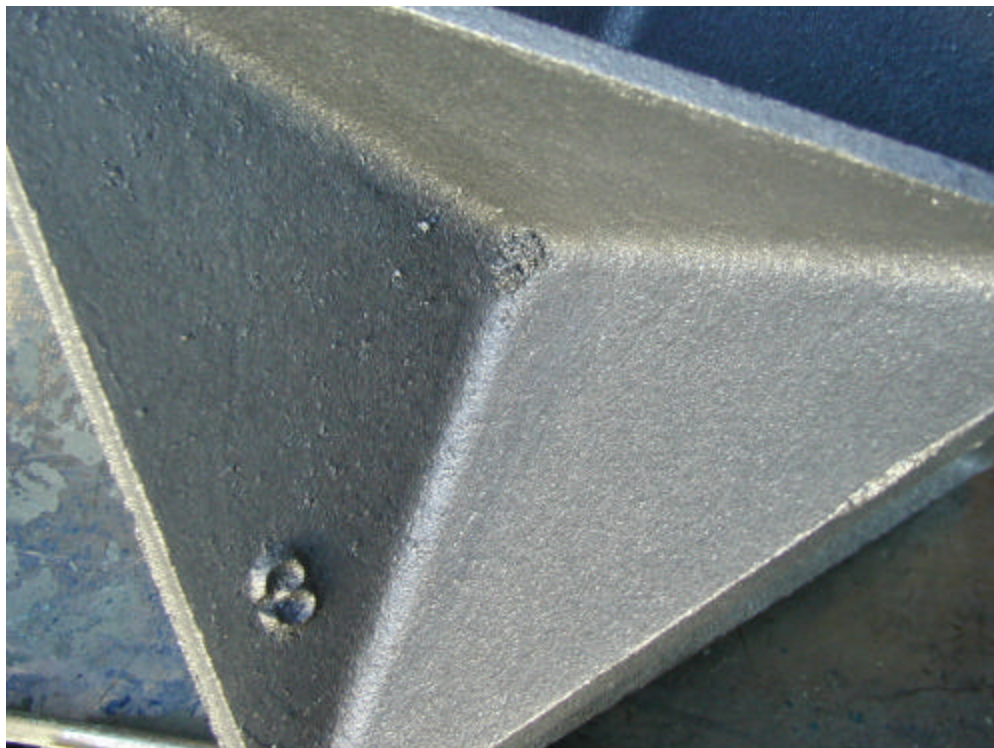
Mold FN001 cavity 3 casting ranked 1 of 9.
